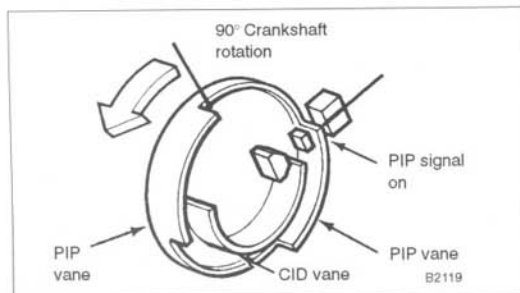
In Dual-Hall Crankshaft Sensor, outside sensor operates as PIP to signal rpm and Crankshaft Position. Inside Hall sensor operates as CID to identify which coil should be fired.
